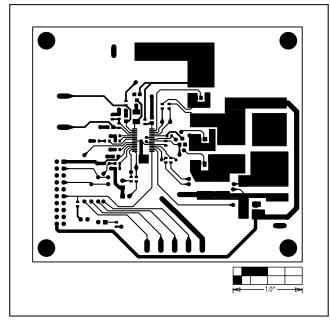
MAX1645B EV Kit PC Board Layout—Component Side
